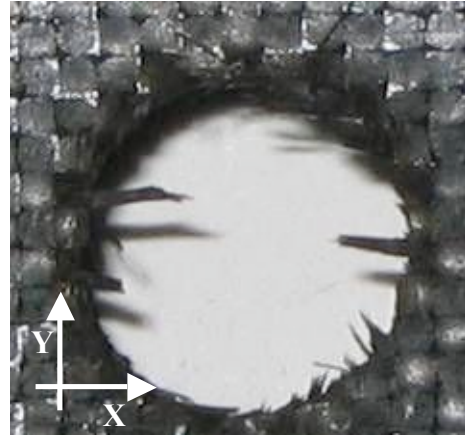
DEFECT IN LOW-FEED DRILLING.
